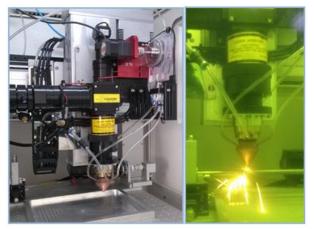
A 3D laser coating equipment and processing image to make a Cr-coated layer on the zirconium cladding surface.
